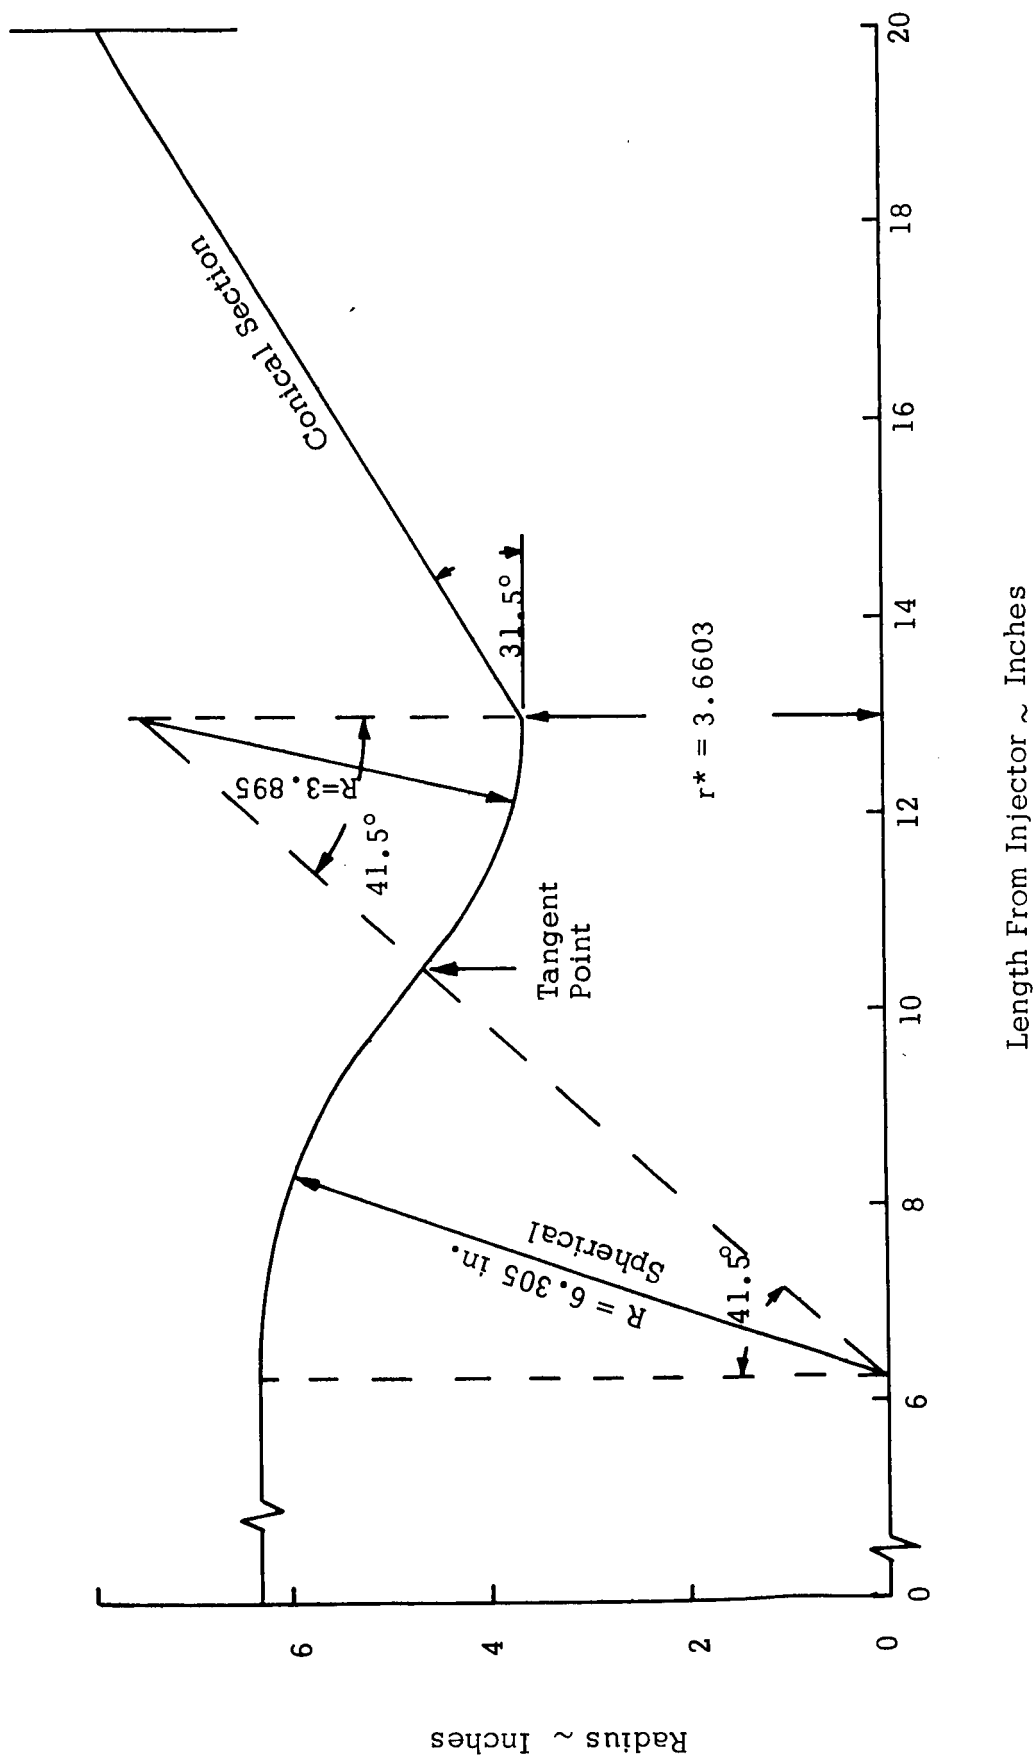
Chamber, Throat and Conical Divergent Section Geometry of the Transpiration Cooled Engine
